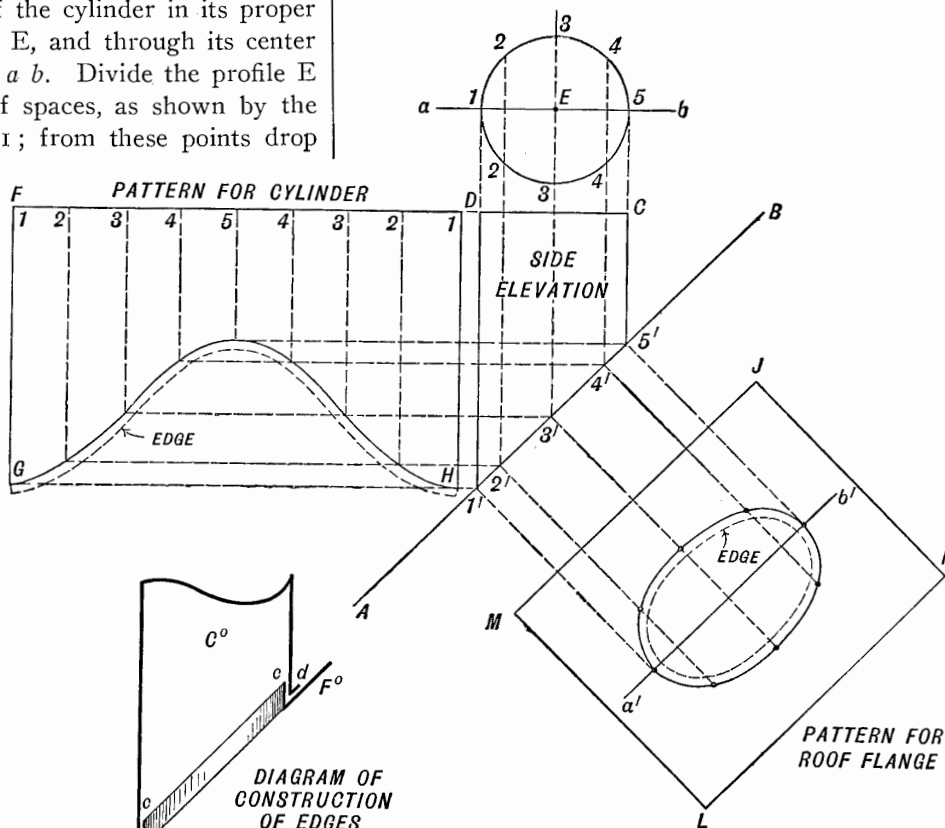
Patterns for Roof Flange and Cylinder on Single Pitch Roof
